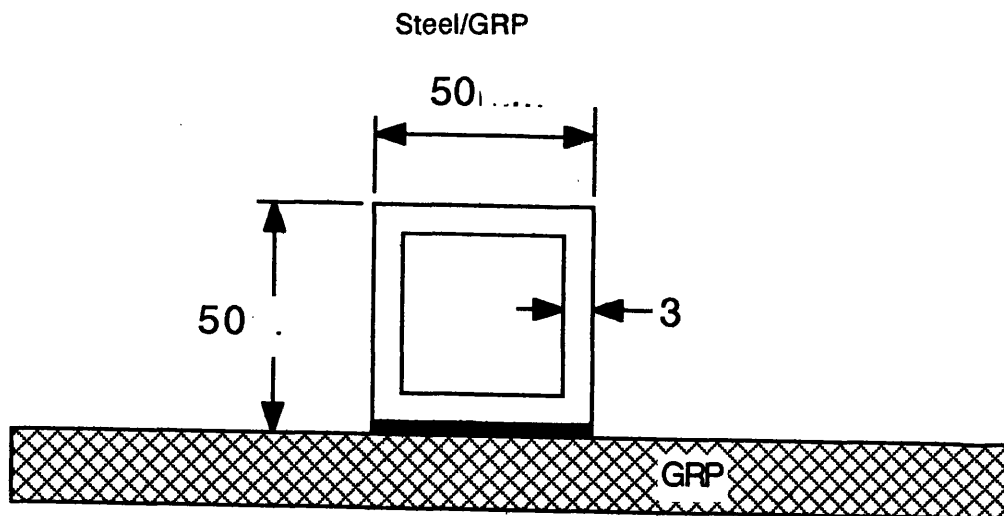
BONDED STIFFENER/PLATE CONNECTIONS
